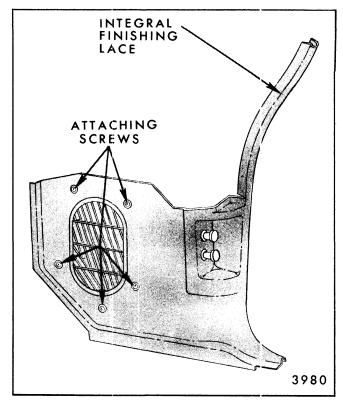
Shroud Side Finishing Panel - "F" Styles
